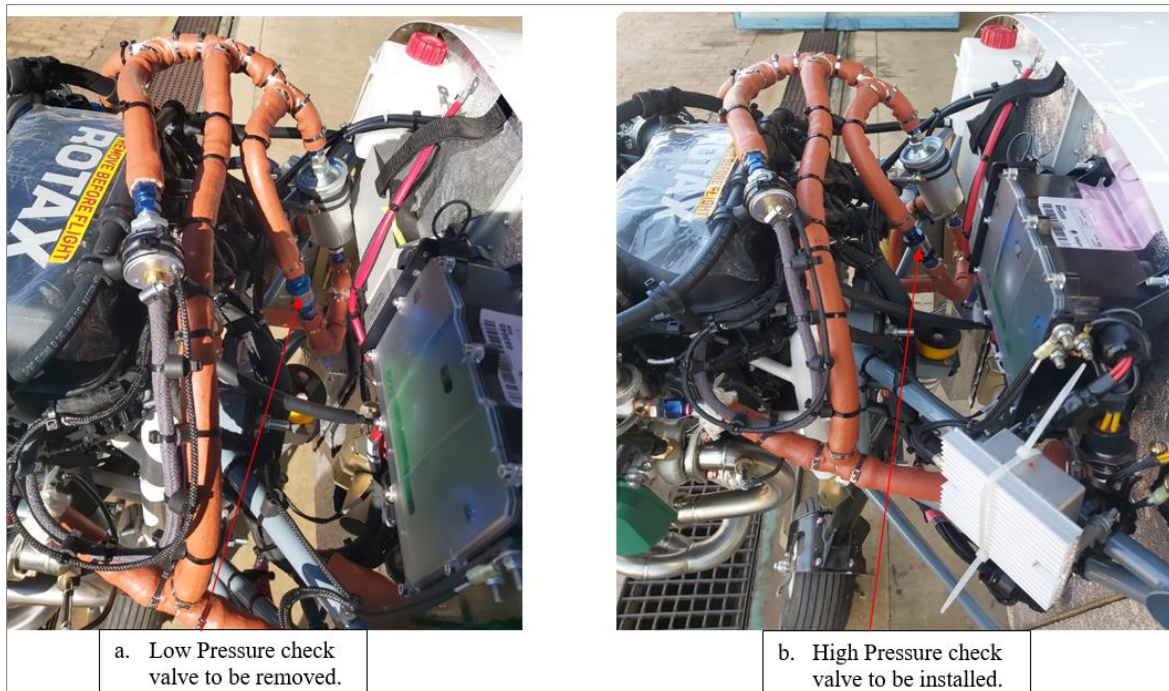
Installed a. Blue Low Pressure Check Valve and b. Black High Pressure Check Valve.
